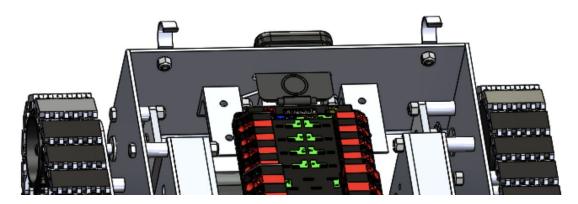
Rear of chassis depicting location of basket mounting and PDB mounting brackets
